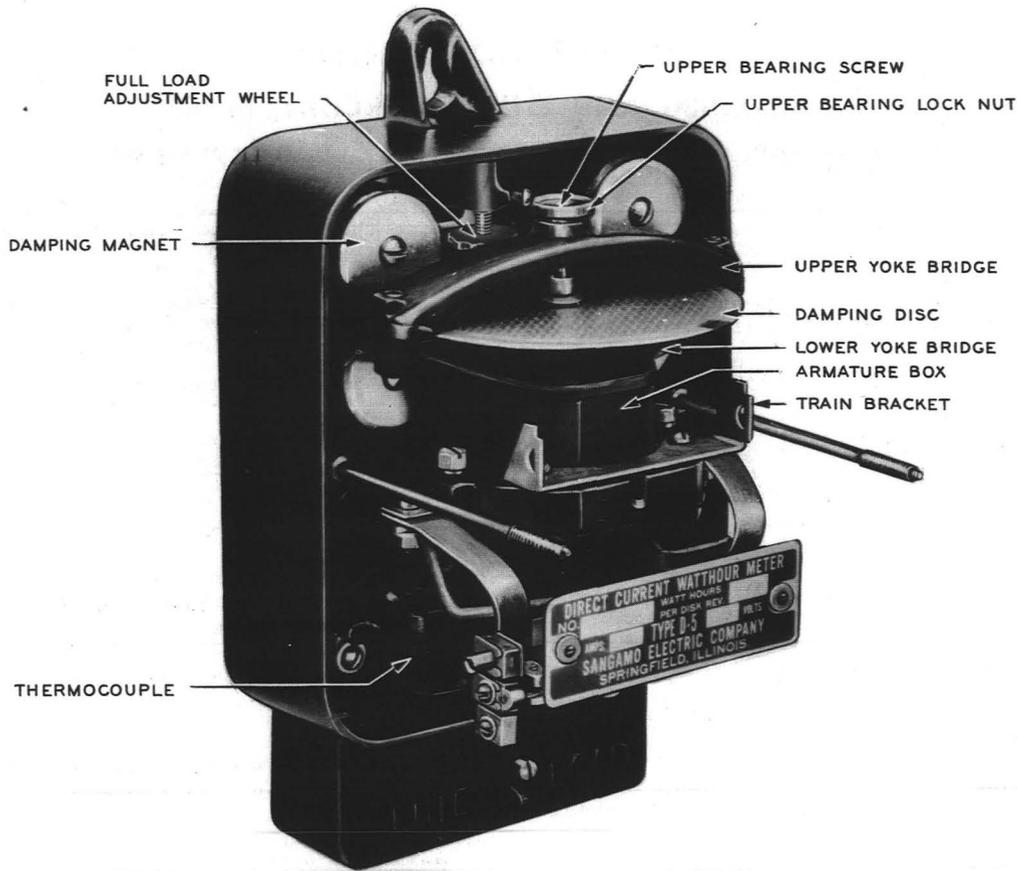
Direct Current Watt-hour Meter Assembly - Dial and Gear Train Removed
